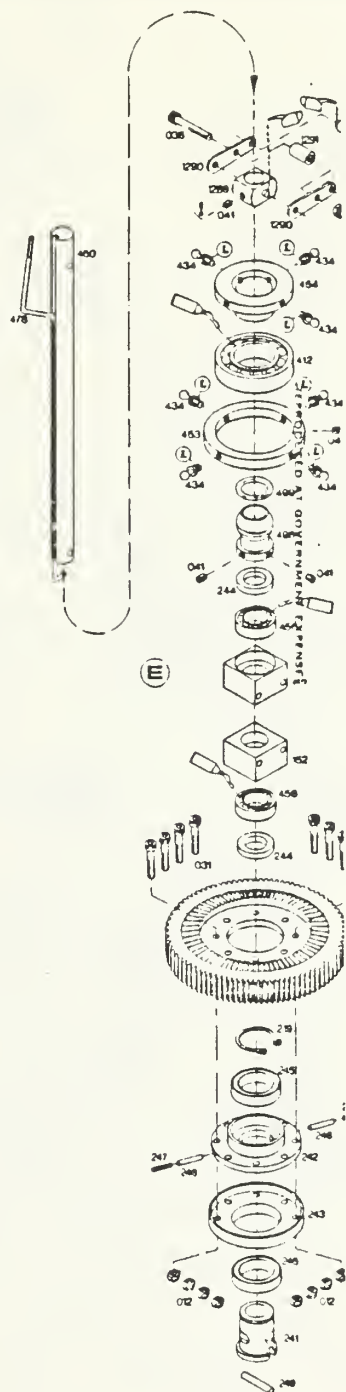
Main Rotor Drive Gear & Swash Plate Assembly
